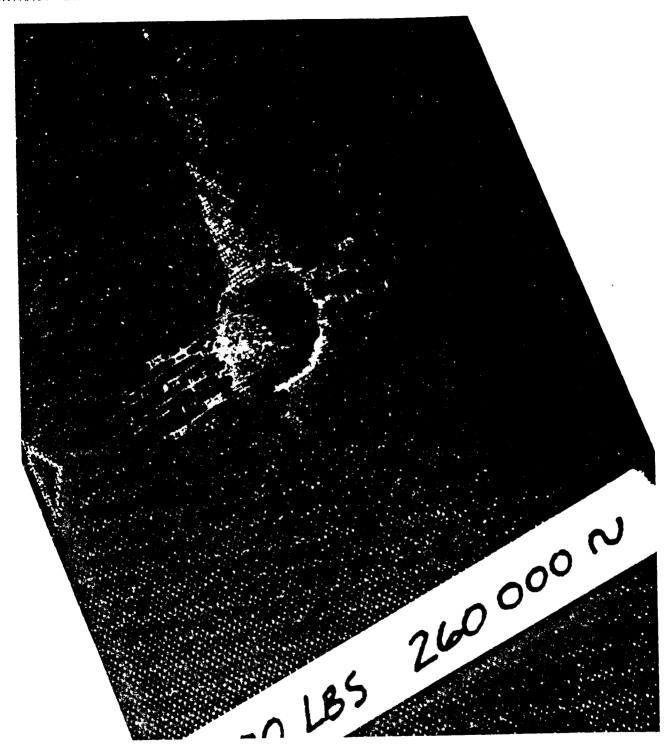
CLOSE-UP VIEW SHOWING FATIGUE DAMAGE IN IMPACT-DAMAGED SPECIMEN
